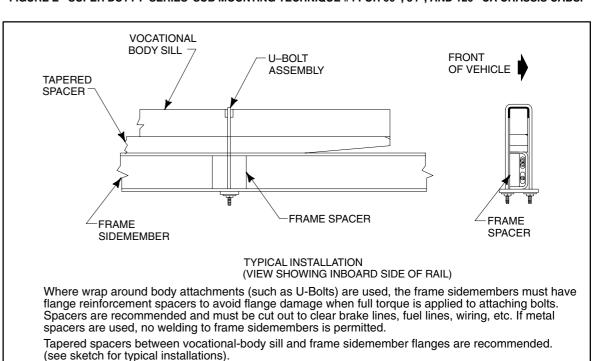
FIGURE E - SUPER DUTY F-SERIES SUB MOUNTING TECHNIQUE #4 FOR 60", 84", AND 120" CA CHASSIS CABS.
